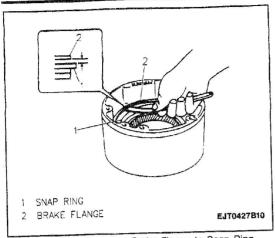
Measuring Brake Flange to Snap Ring Clearance
